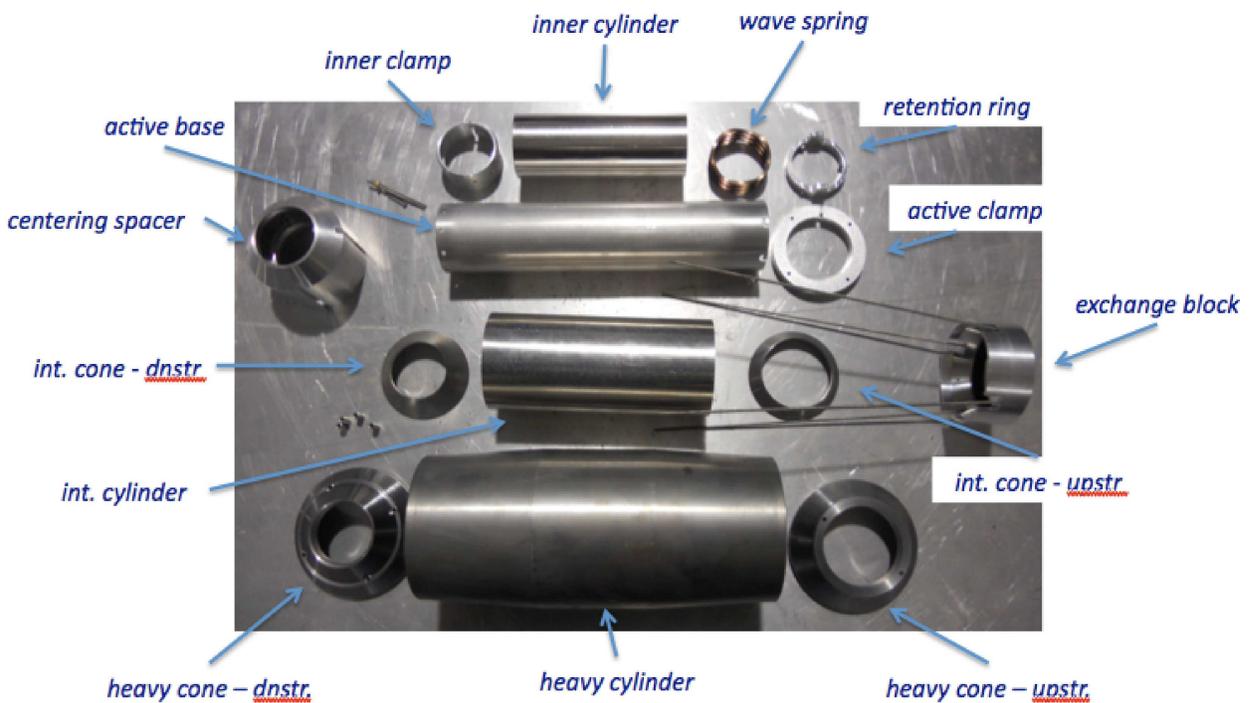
Photograph of the components that make up the CTOF magnetic shield system. Shown are the external heavy shield (1006 steel), the intermediate shield (Hipermet-49), and the inner shield (Co-netic). The mandrel used to wind the compensation coils is labeled as the *active base*.
